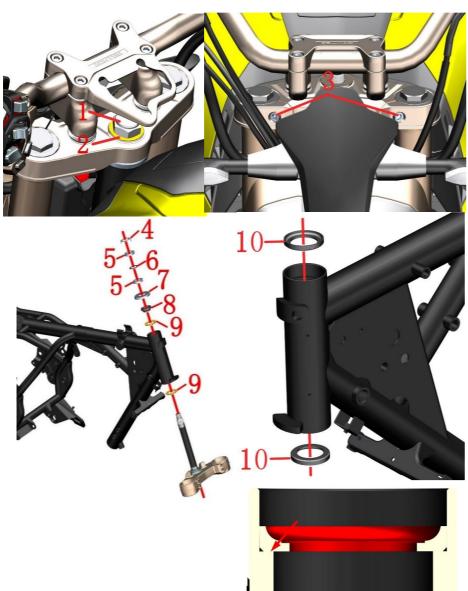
FRONT FORK COMPONENT		Steering adjustment	CHK	40)
